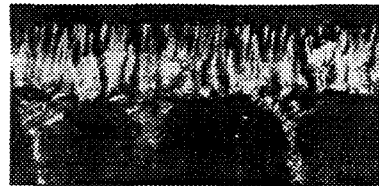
view of cut edge with nozzle gap 1.1mm (0.2t)
